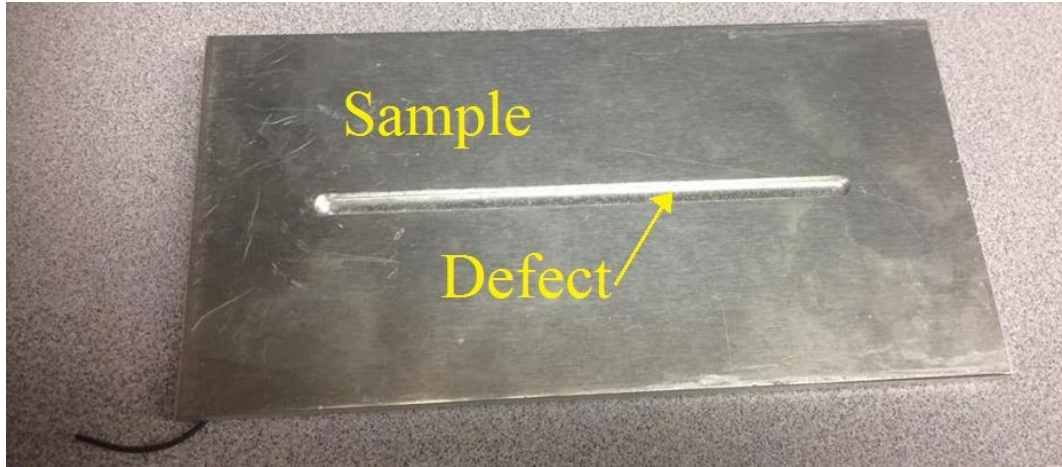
Bottom view shows the subsurface defect in the aluminum sample
